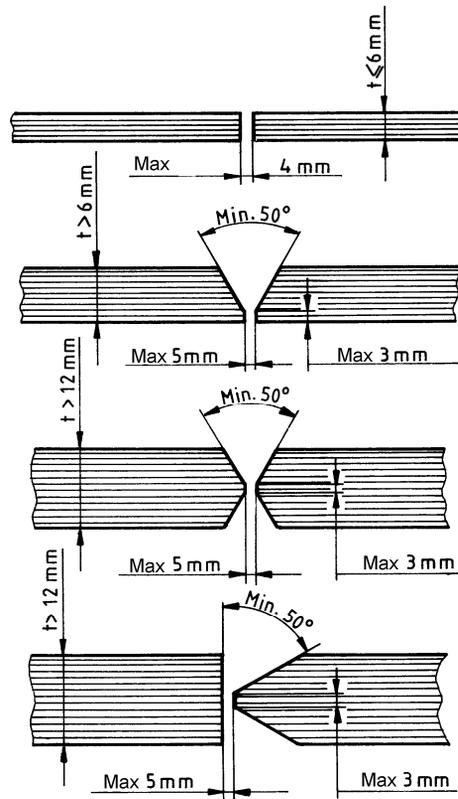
Edge preparation for manual butt welding
